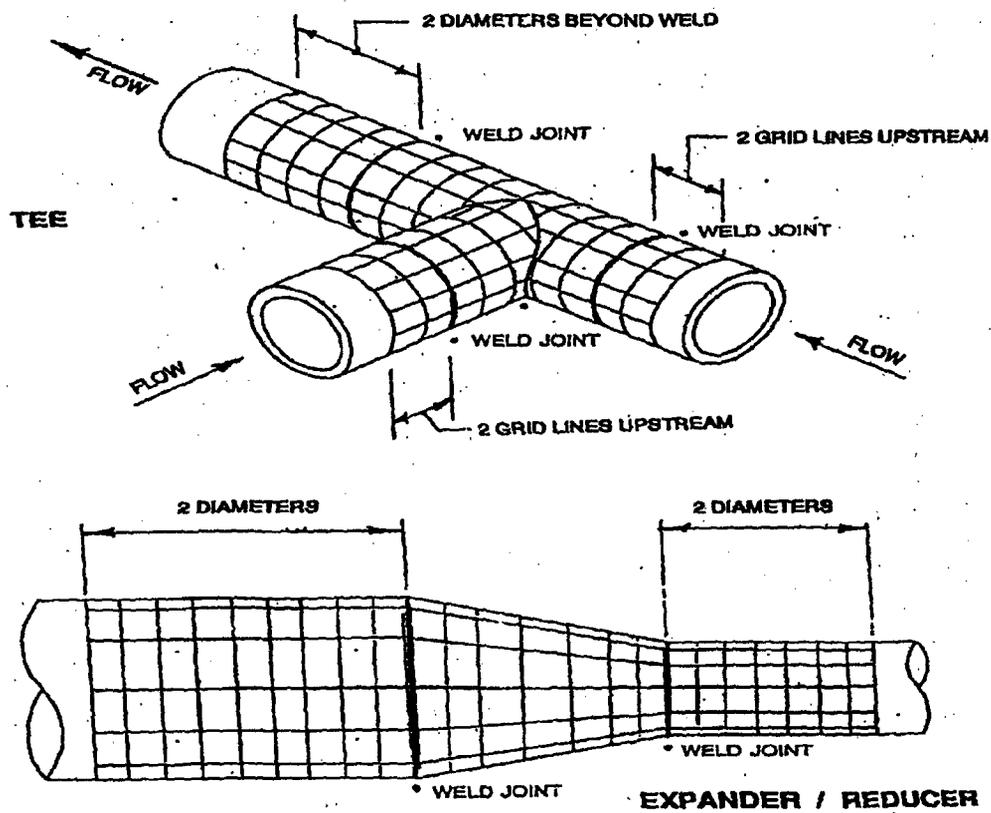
INSPECTION GRID LAYOUT FOR TEES AND EXPANDERS/REDUCERS
